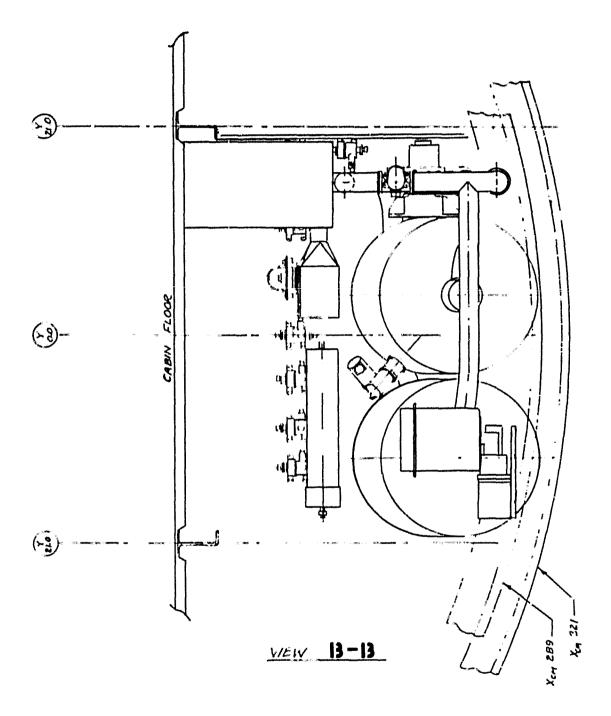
LARS INSTALLATION DRAWING (SHEET 3)
